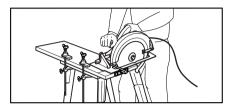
A typical illustration of proper hand support, workpiece support, and supply cord routing.
